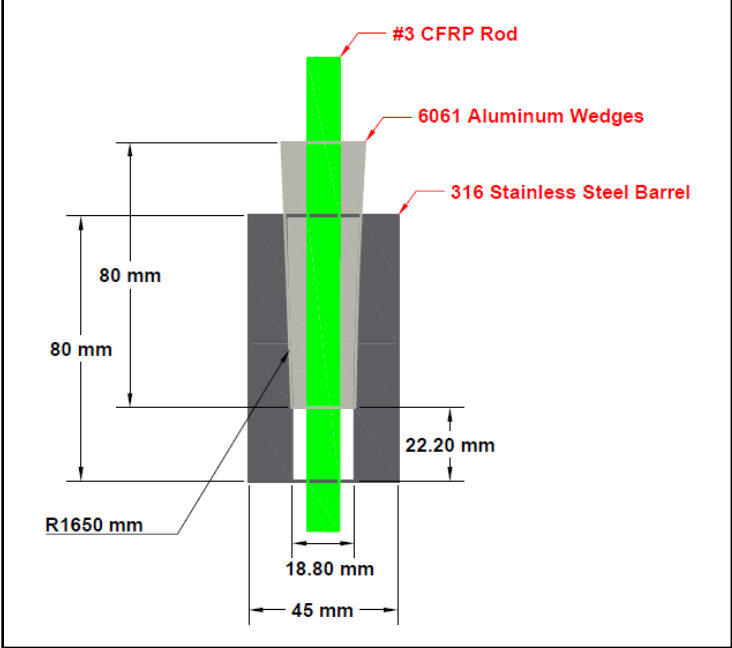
Split Wedge and Barrel Anchor Geometric Details
